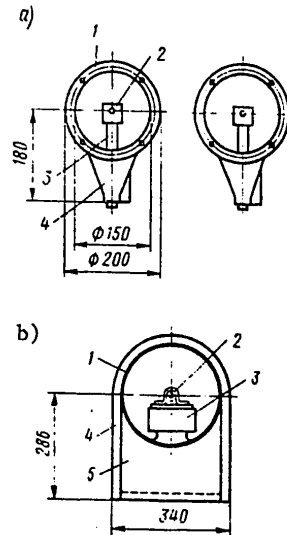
Structural design of the feeder line in a cylindrical shield: a -- shielded symmetric coaxial feeder; b -- shielded asymmetric coaxial feeder (1 -- tube; 2 -- rod; 3 -- insulator; 4 -- attachment of the insulator; 5 -- base)
